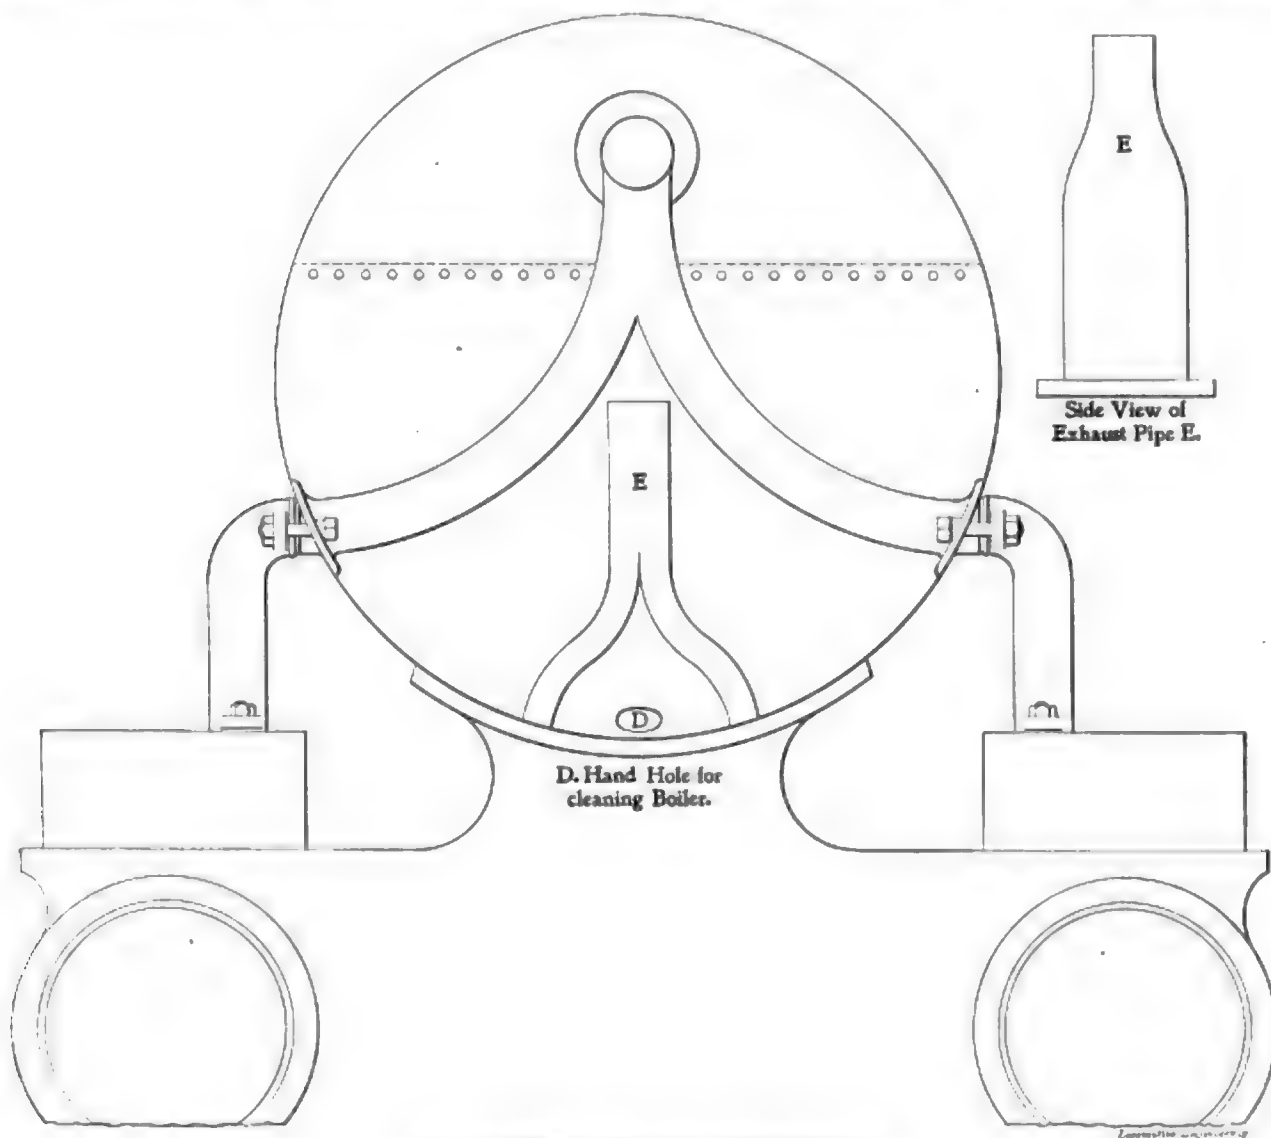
PROPOSED STEAM AND EXHAUST PIPES.
